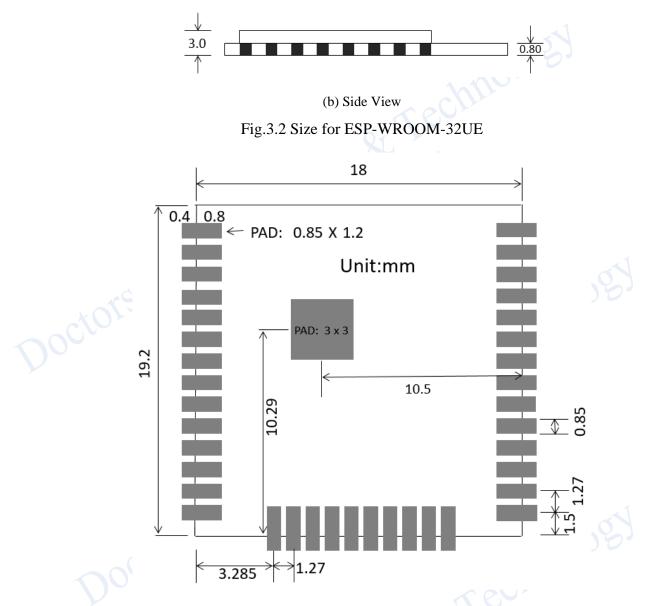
PCB Layout for ESP-WROOM-32UE
